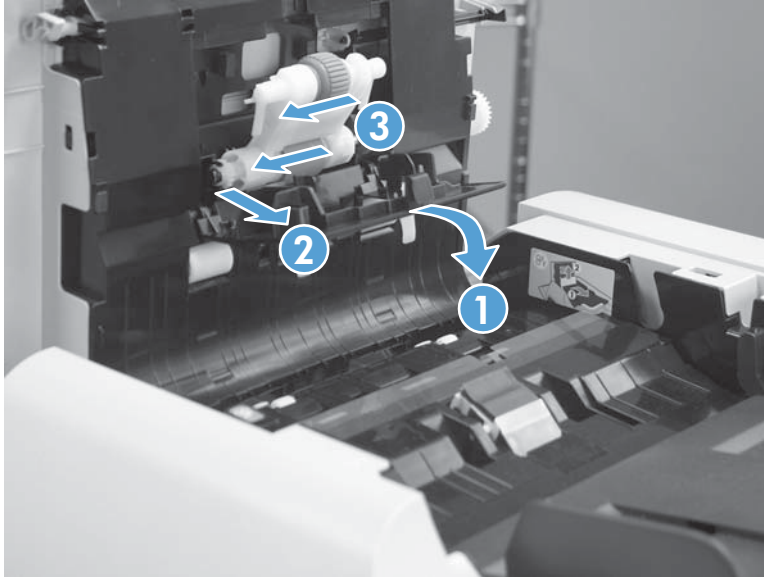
Remove the document feeder pickup roller pad and spring (2 of 2)
